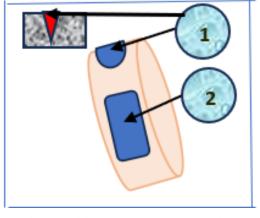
Metal deposition on screw contact surface (1, 2 material deposited by flux welding).
